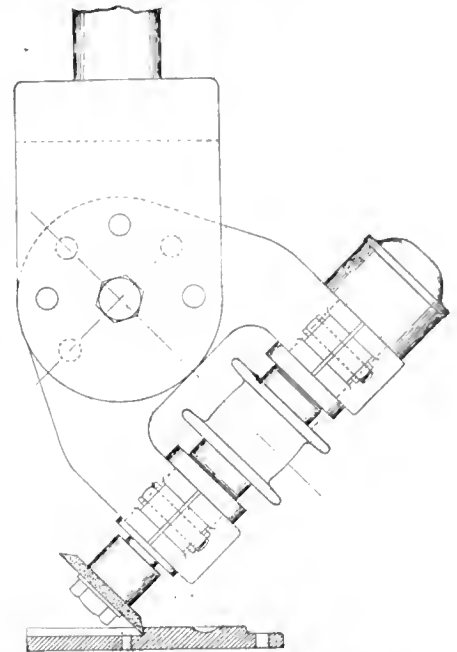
GRINDING OUT CORNERS OF RECESSES WITH BEVELED WHEEL.
